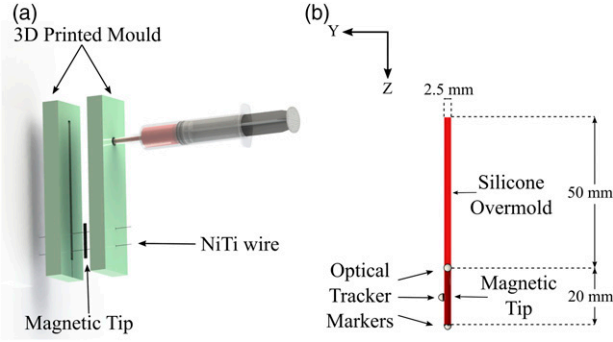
(a) Fabrication of the single-segment SCR. The magnetic tip was held in place with two pieces of NiTi wire whilst a silicone based elastomer (shown in red) was injected into the closed 3D printed mold. (b) Final single-segment SCR after curing. The magnetic tip was facing downwards such that its magnetization is equal to \mathbf{m}_z . Optical tracking markers were used to track the position of the SCR's tip.
